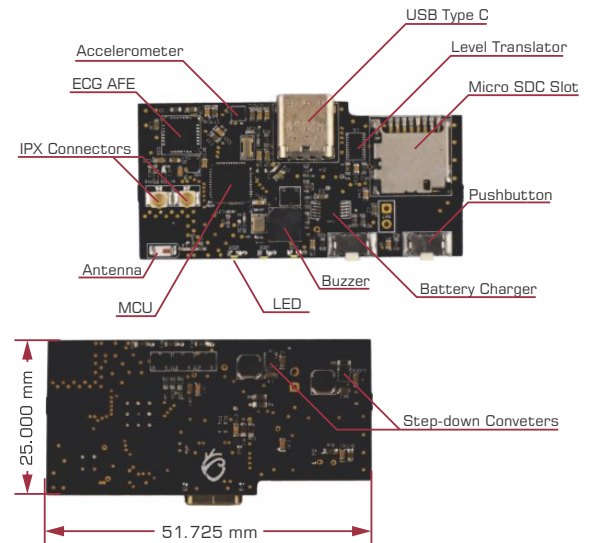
Pictures from PCB top layout (top) and bottom layout (bottom). The critical parts and the PCB dimensions are marked.
